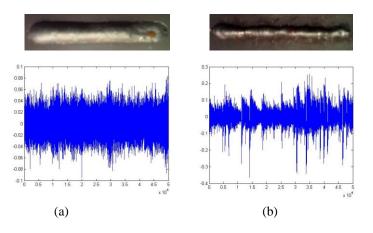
(a) stable arc welding, (b) unstable arc welding
